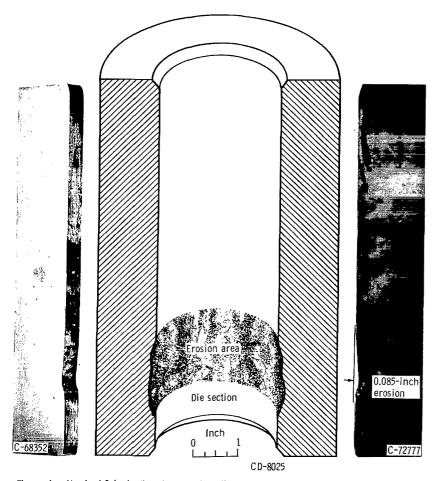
Nominal 2-inch-diameter container liner number 6 eroded 0.085 inch at juncture of billet and die after 106 high-temperature extrusions.
